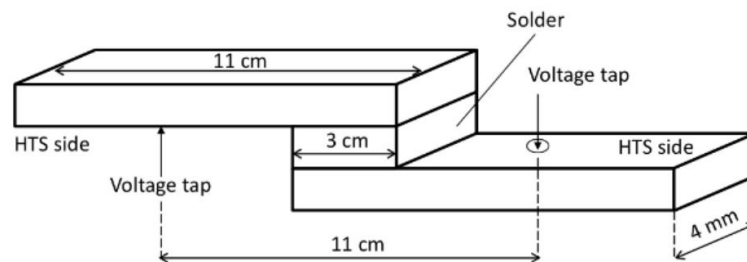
View of the face-to-face welded joint of two pieces of 2G HTS cable
